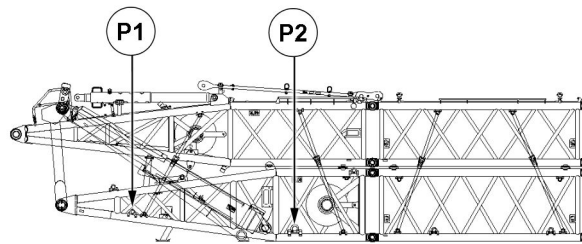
WA-frame 1 pivot section with WA-frame 1 intermediate section 4 m and WA-frame 2 pivot section with WA-frame 2 intermediate section 4 m unit fastening points
